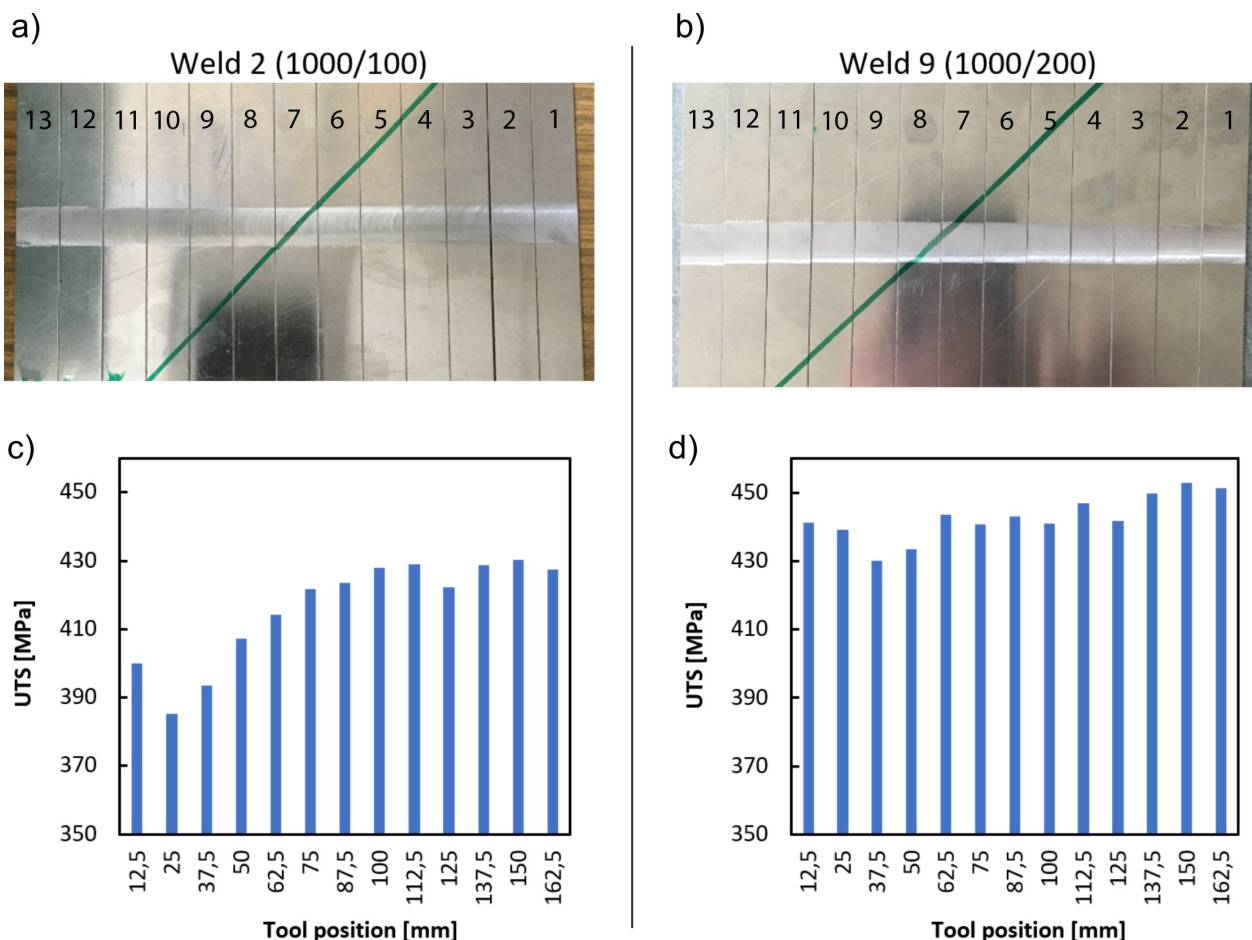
View of FSW welds with prepared samples – a) and b); c) and d) UTS for sample extracted from various locations of the weld (tool position from edge of the sheet)
